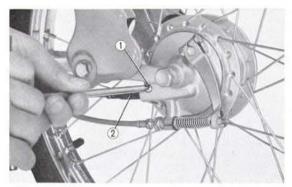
(1) 4 × 16 cross scraw (2) Speedometer cable
